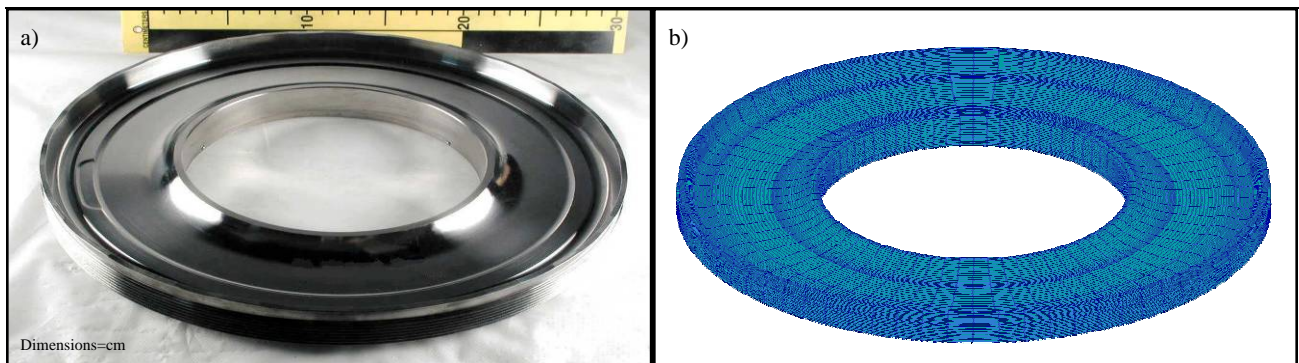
Forward side view of a) the cracked turbine spacer and b) the 3D FE model.
